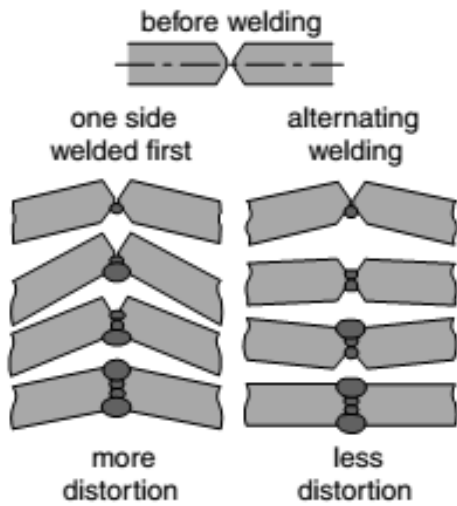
Reducing angular distortion by using double-V joint and welding alternately on either side of joint. Modified from TWI (7).
